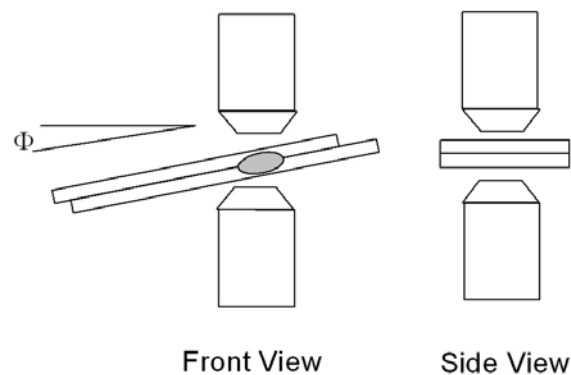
Angled weld with the inclined angle, Φ .
